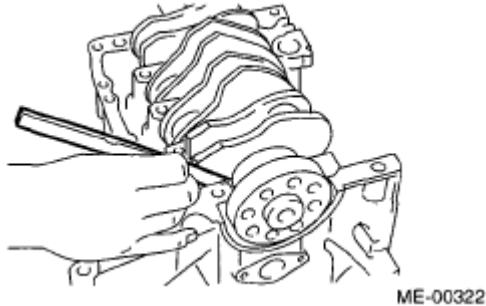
Measuring Crankshaft Thrust Clearance Using Thickness Gauge
